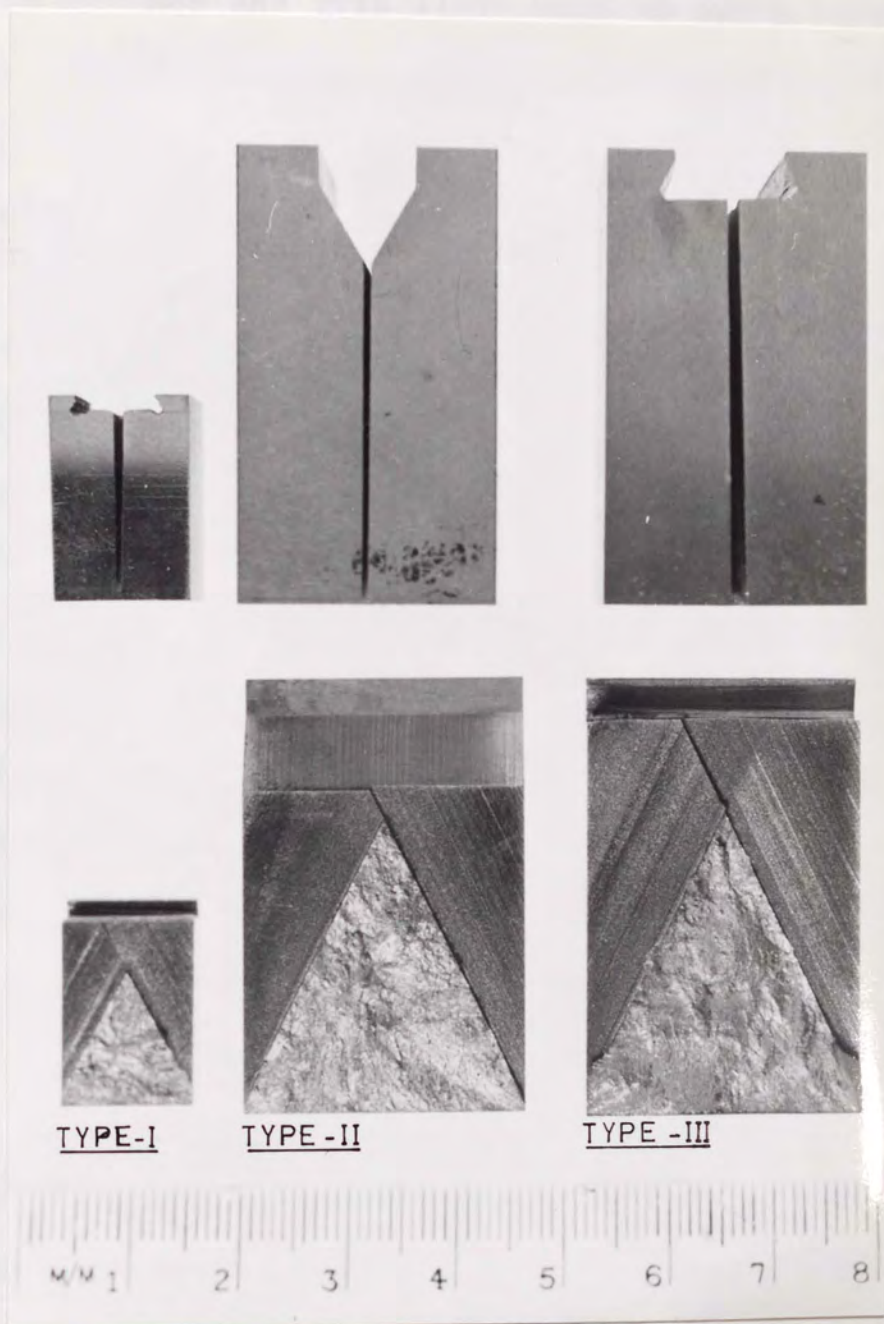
General appearance of short-bar fracture toughness test specimens and chevron notch detail
